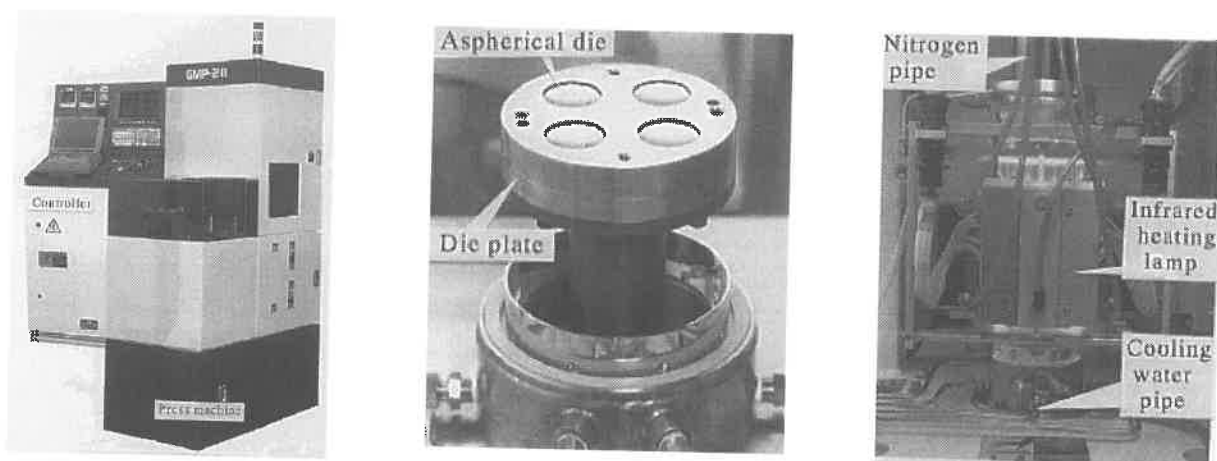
(a) shows a view of glass molding press machine and Fig.5(b) shows a view of molding die installed in the press machine. Dies with outer diameters of up to 110 mm can be mounted to make possible the molding of a number of small diameter lenses in a single operation. Fig.5(c) shows a view of molding unit. Infrared heating system can heat the dies and glass
